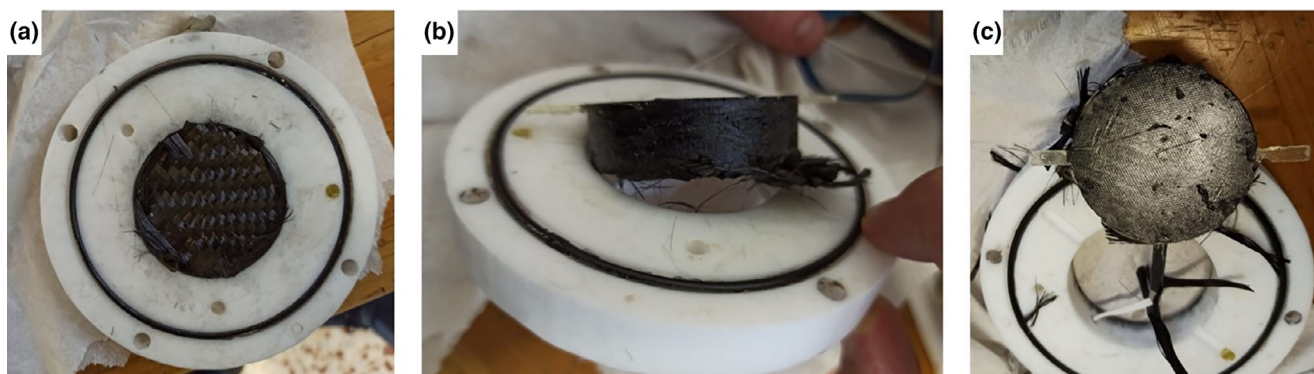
Pictures of a carbon-filled sample processed in the two-side heated 15.2 mm mold. (a) Lower view, (b) side view, and (c) upper view [Color figure can be viewed at wileyonlinelibrary.com]
